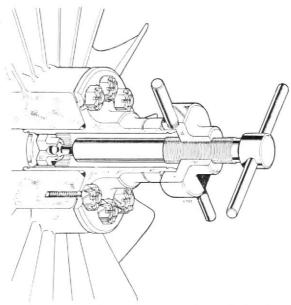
Assembly of accessory drive shaft plug extractor T.76579 to the impeller.
